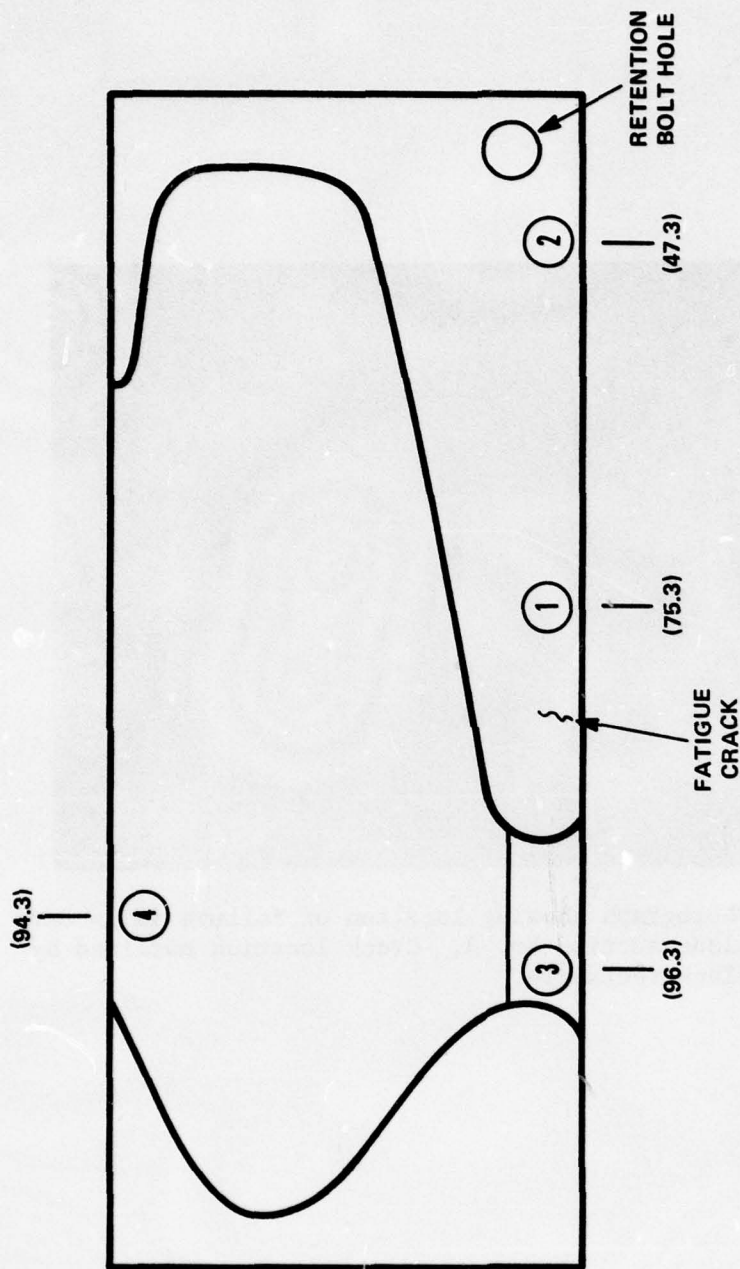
Sketch showing location of fatigue crack in inboard blade section No. 3. Numbers in parentheses represent distance from rotor system center in inches. Numbers in circles indicate transducer positions. Sketch shows blade top view; however, crack was located on underside of blade.
